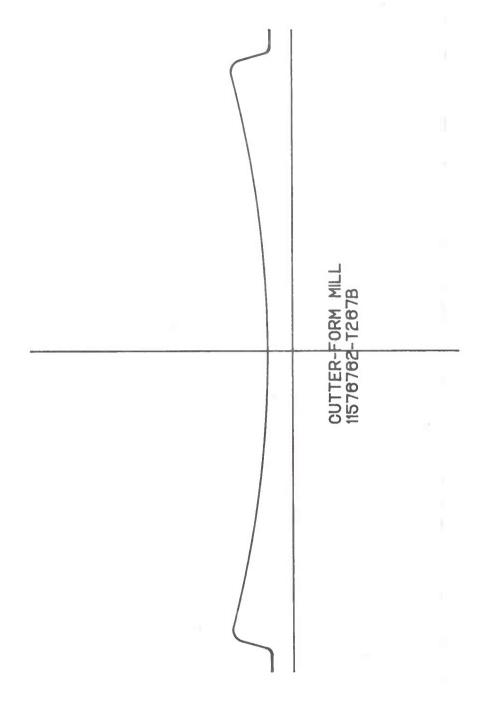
Cutter form tool comparator chart for the 152mm M81 gun tube.
